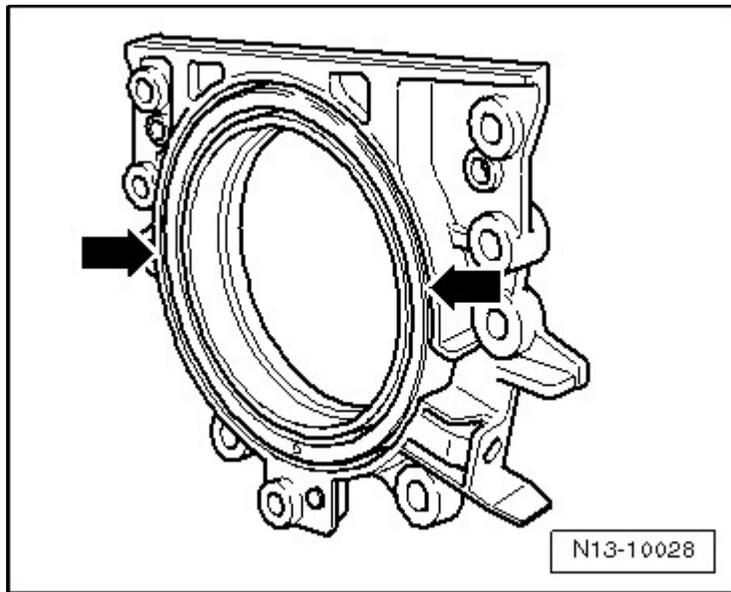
Identifying Upper Edge Of Sensor Wheel And Front Edge Of Sealing Flange Align
